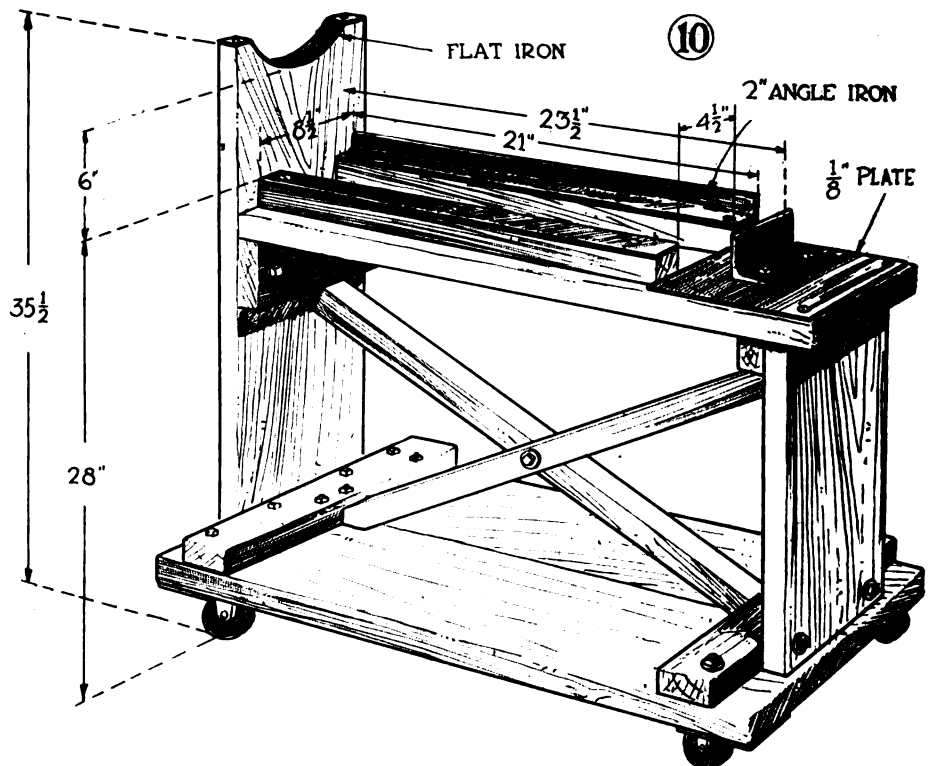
Wooden engine stand for holding the assembled engine upside down for easy removal of the crankcase and subsequent work on the bearings and connecting rods. The head is removed from the engine before transferring it to this stand
